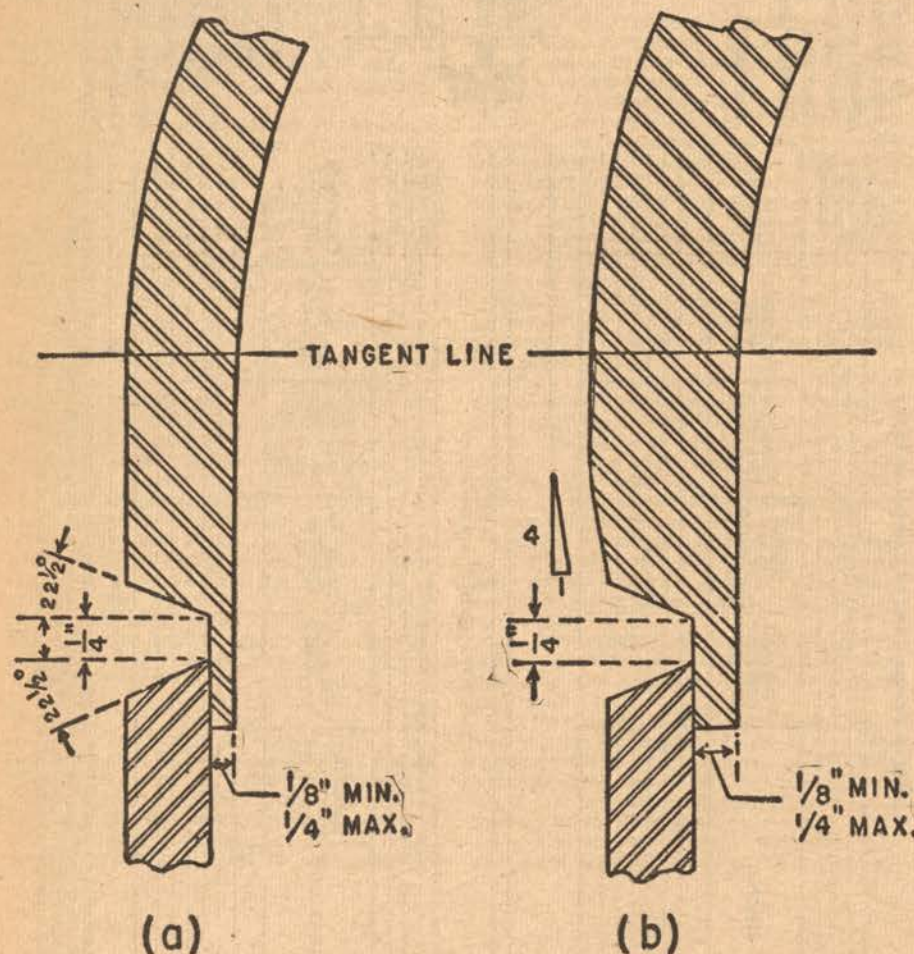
Optional welding for head-shell joints (when inside diameter is not over 86 inches).
